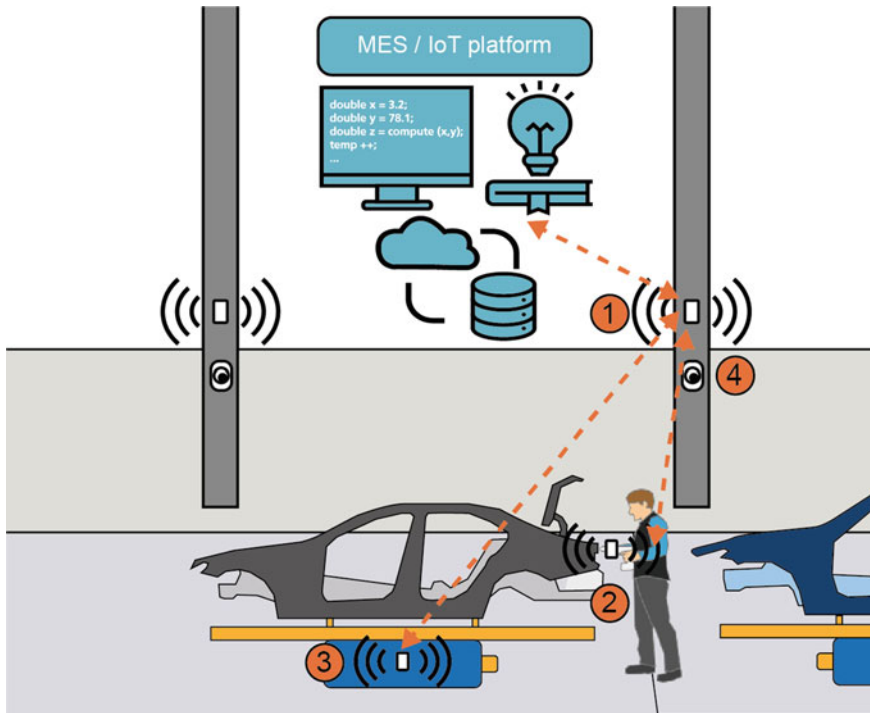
I4.0-enabled manual assembly station for screwing processes in an automotive assembly line
